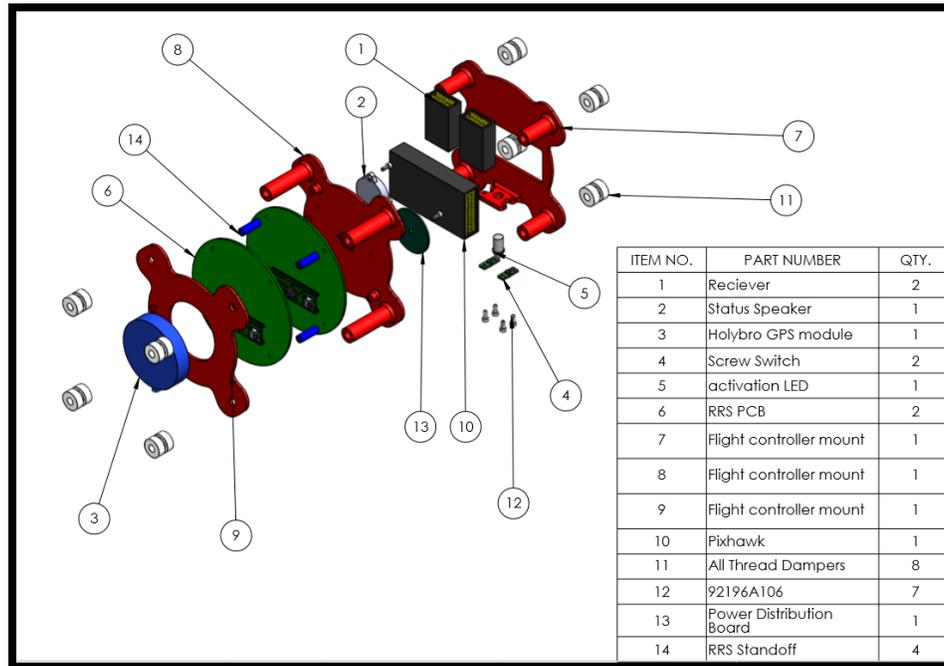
BOM for all parts, fasteners, and electronics housed in the assembly.
